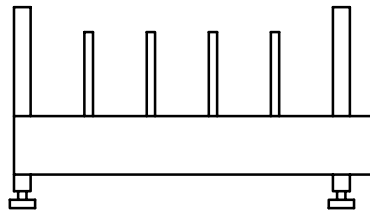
Machine frame with supporting walls placed on top of machine bed
